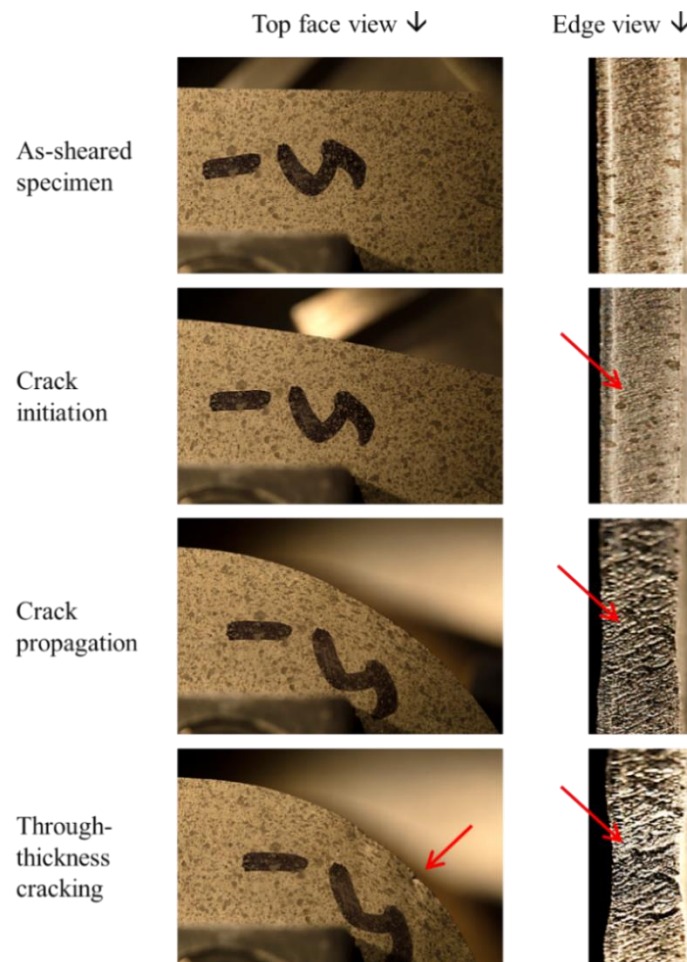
Fracture development in the side-bending test for DP980-1 trimmed at 4% clearance.
